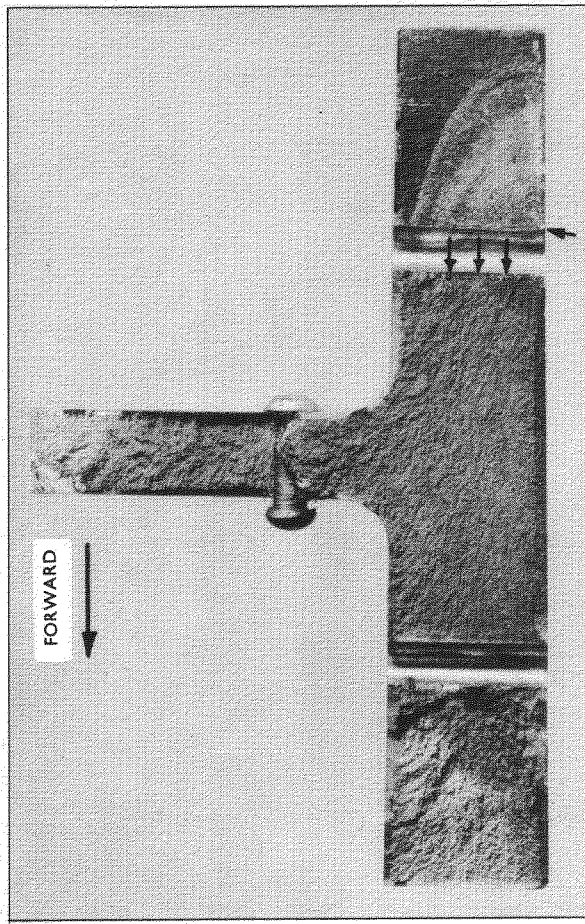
TENSION BOOM FRACTURE, STARBOARD INNER WING, FIRST TEST
